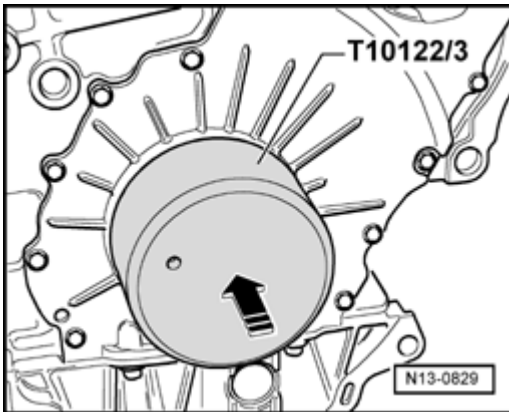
Installing Assembly Sleeve T10122/2 Together With Gasket Onto Crankshaft Flange
